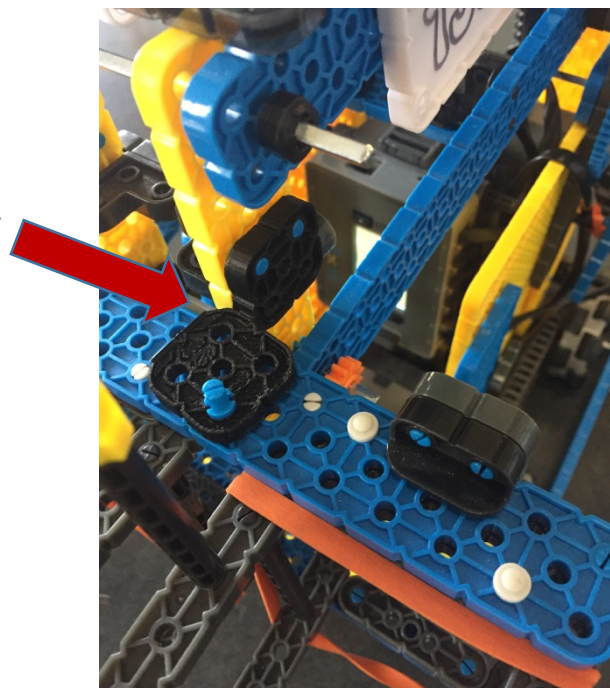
Printed 3D piece. We tested if the pins would fit and they did. Quality not perfect.
